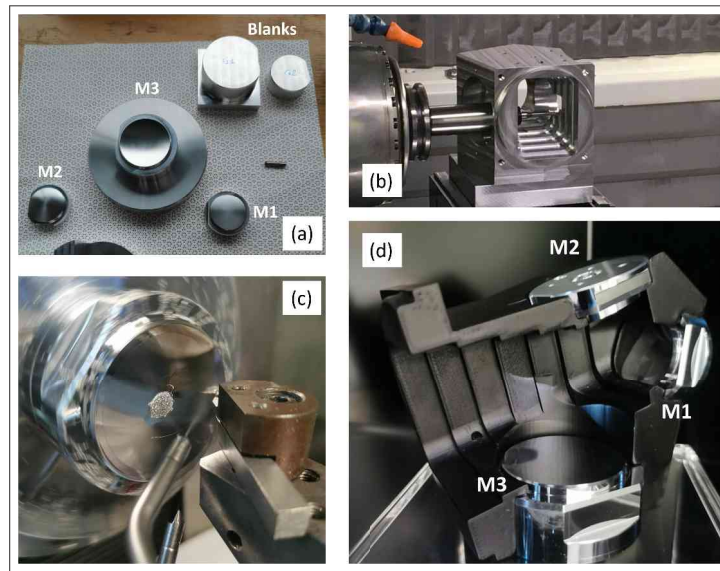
(a) Blanks of the three freeform mirrors of the αZ prototype. The two block marked G1 and G2 are blanks for the final mirrors. (b) Manufacturing of the mechanical structure of the αZ prototype using 5 axis machining. (c) Diamond turning of the third mirror of the αZ prototype. (d) cross-section of the design.
